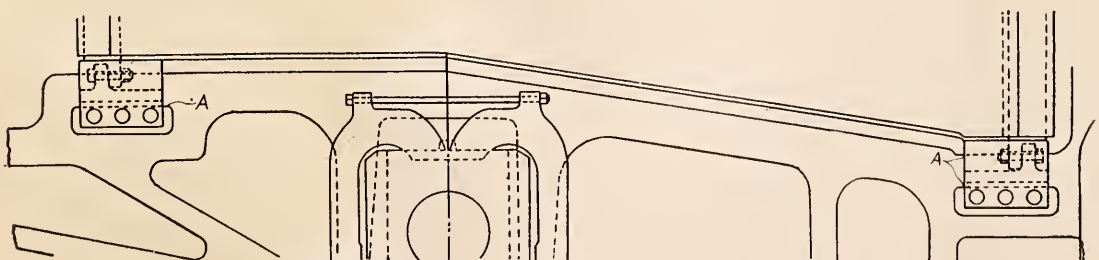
SHOWING FURNACE ANCHOR FASTENINGS.
